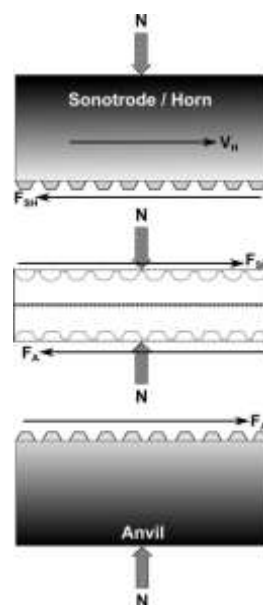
Free body diagram of workpieces, horn, and anvil [18]
